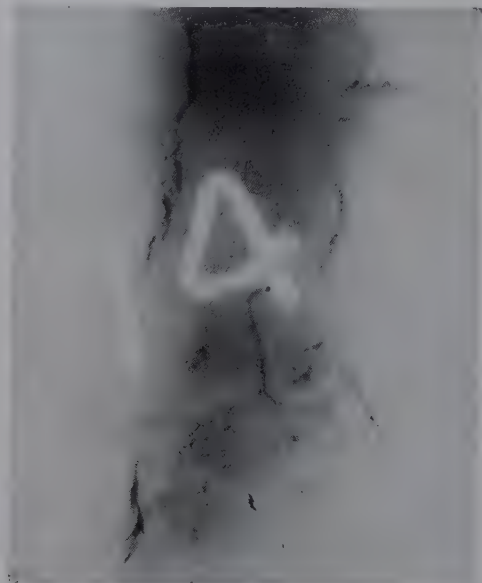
Radiograph of steel casting, showing internal cracks.
